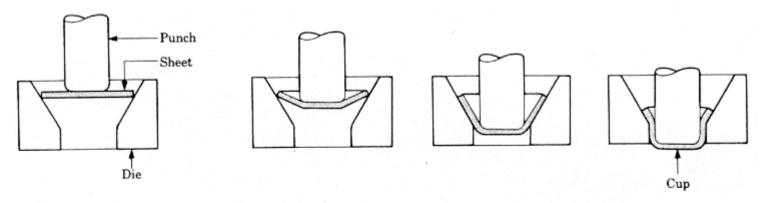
Deep drawing without a blank holder, using a die with a conical profile. The sheet metal should be relatively thick for this process to be successful; otherwise it will wrinkle at the periphery (similar to the wrinkles on the periphery of paper plates or along the edges of thin aluminum trays for food products).
